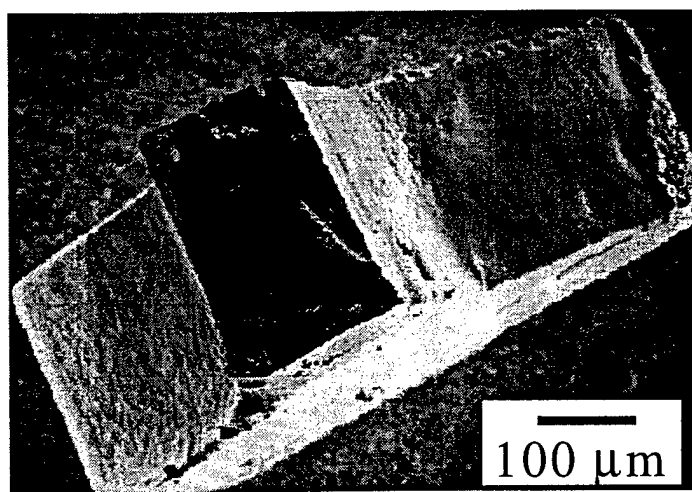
Cross-sectional view of the gage section of a fractured microsample. This observation indicates that the rectangular cross-section is maintained and that the specimens are electro-polished to a mirror finish on all four sides.
